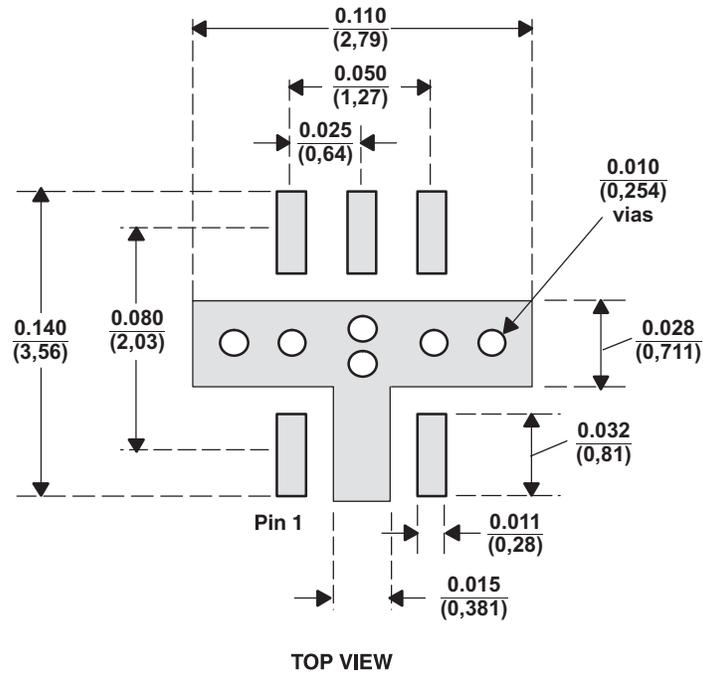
THS9000 Recommended Footprint dimensions are in inches (millimeters)
